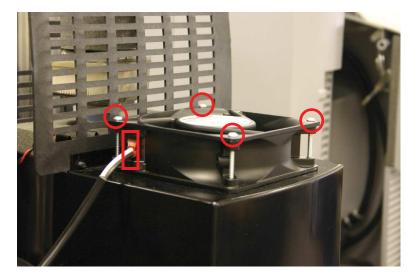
FIGURE S: COOLING FAN SCREW AND WIRE LOCATIONS
